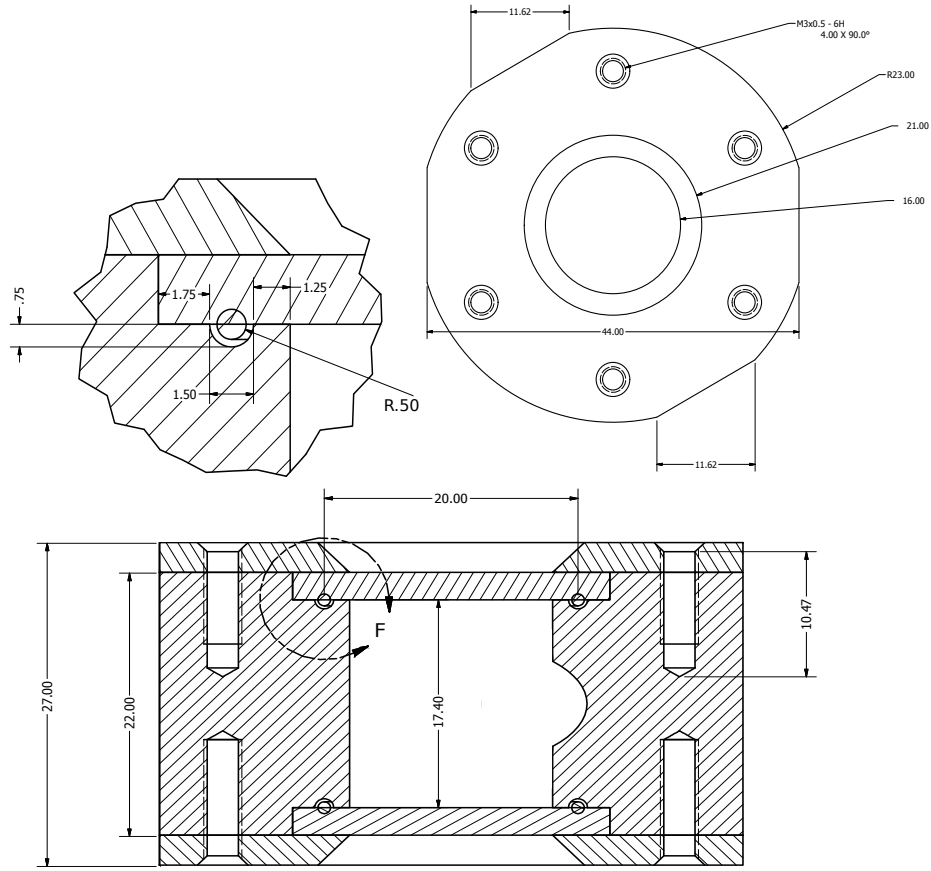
Bottom: cross-sectional view of the chamber, dimensions are shown in millimetres. Top left: Enlarged view of the O-ring seal showing the dimension of the O-ring and the groove. Top right: Plan view from the lid the six screws are used in both the top and bottom plate. The inner sample holder is not shown
